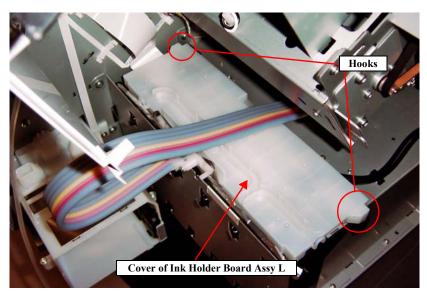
Removing the Cover of Ink Holder Board Assy L
